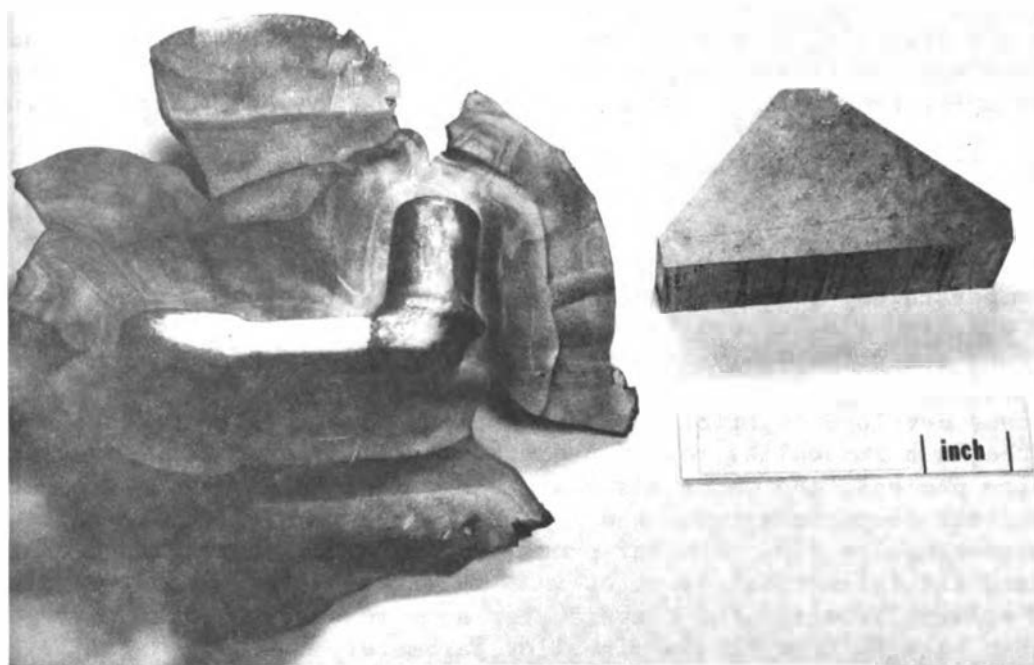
Forging of 25 v/o SiC/6061 aluminum (courtesy of DWA Composite Specialties).
